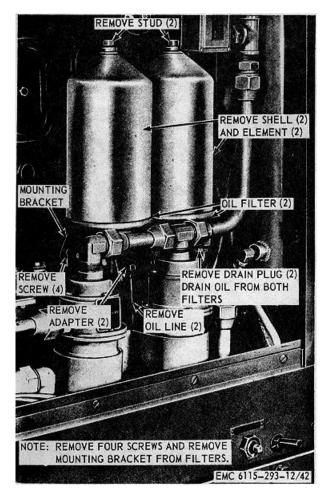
Lubricating oil filters and mounting bracket, removal and installation.
